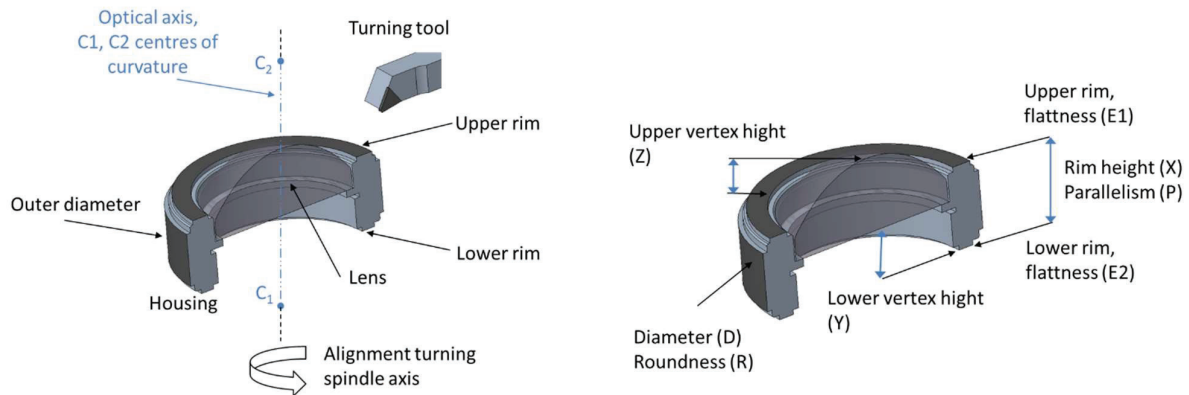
Alignment turning of a lens cell. Left: optical axis (OA) aligned to spindle axis and cutting the reference surfaces in respect to OA. Right: geometrical dimensions and parameters determined by the alignment turning process.
